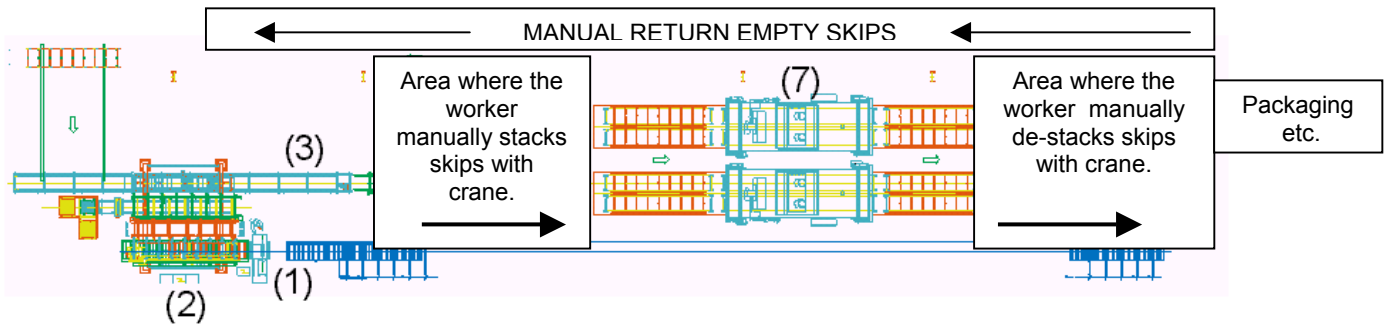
Standard Layout between profile saw and ageing furnace in an extrusion plant.
